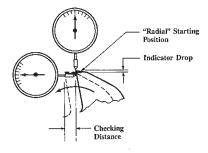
Setup for Checking the Radial Relief Angle by Indicator Drop Method
